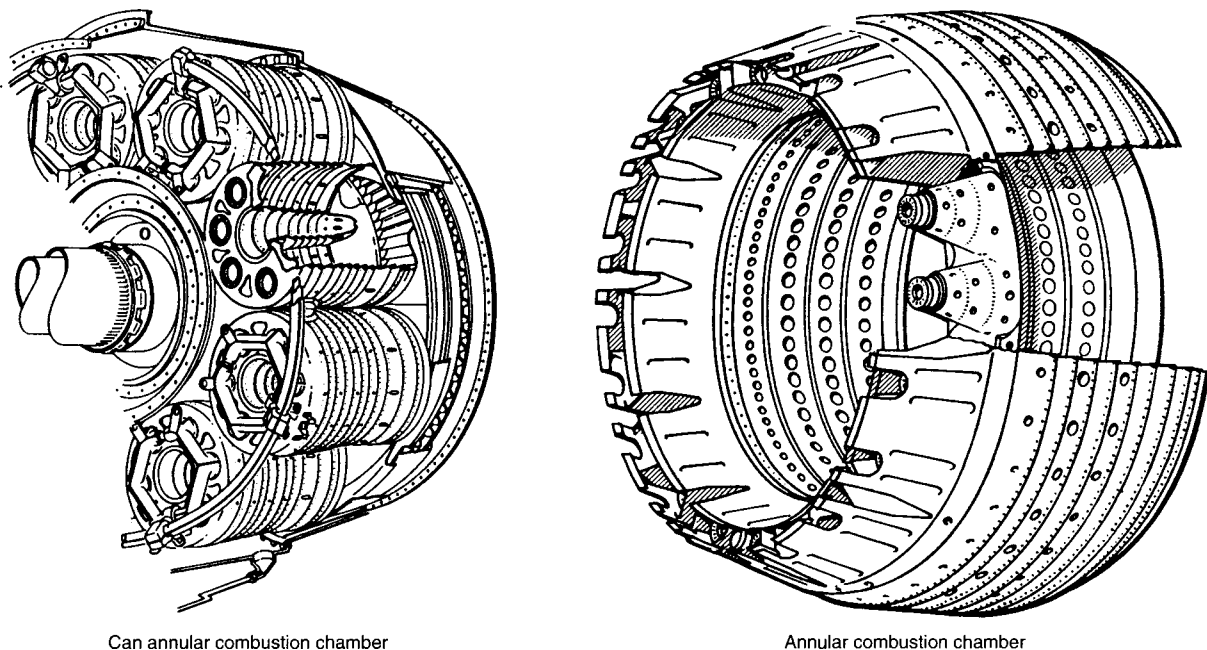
Combustion chamber (combustor) configurations.
